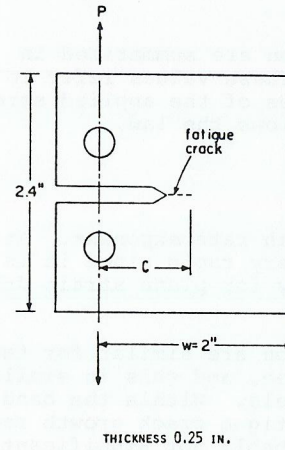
FRACTURE TOUGHNESS SPECIMEN
